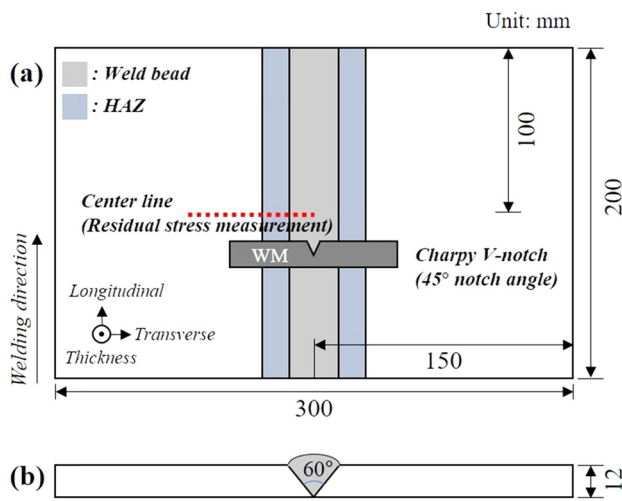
Schematic layout of welding coupons from (a) top view, (b) side view and Charpy impact test specimen.
